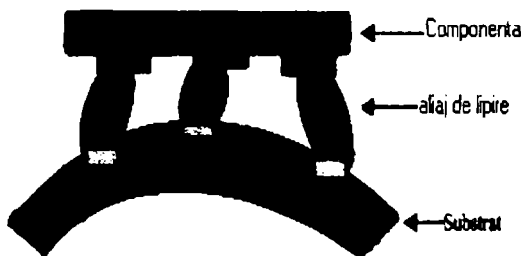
Solder Bumps (joints) subjected to tensile loading due to substrate flexing (bending) during handling of the assembly
